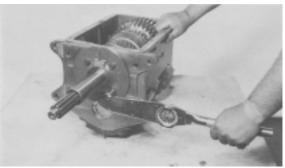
Torque bearing capscrews 15 - 20 Ft. Lbs. Torque [20,4 - 27,1 N,m].
